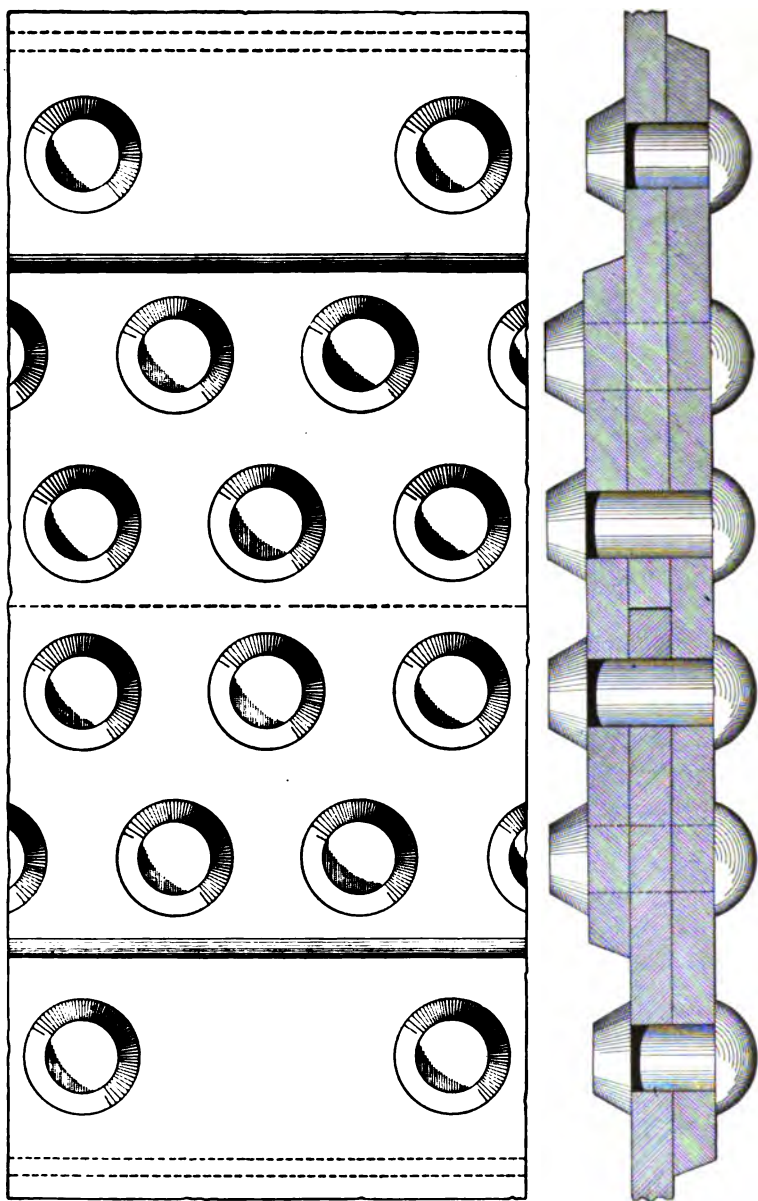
Treble Riveted Butt Joint, with straps of unequal widths.
